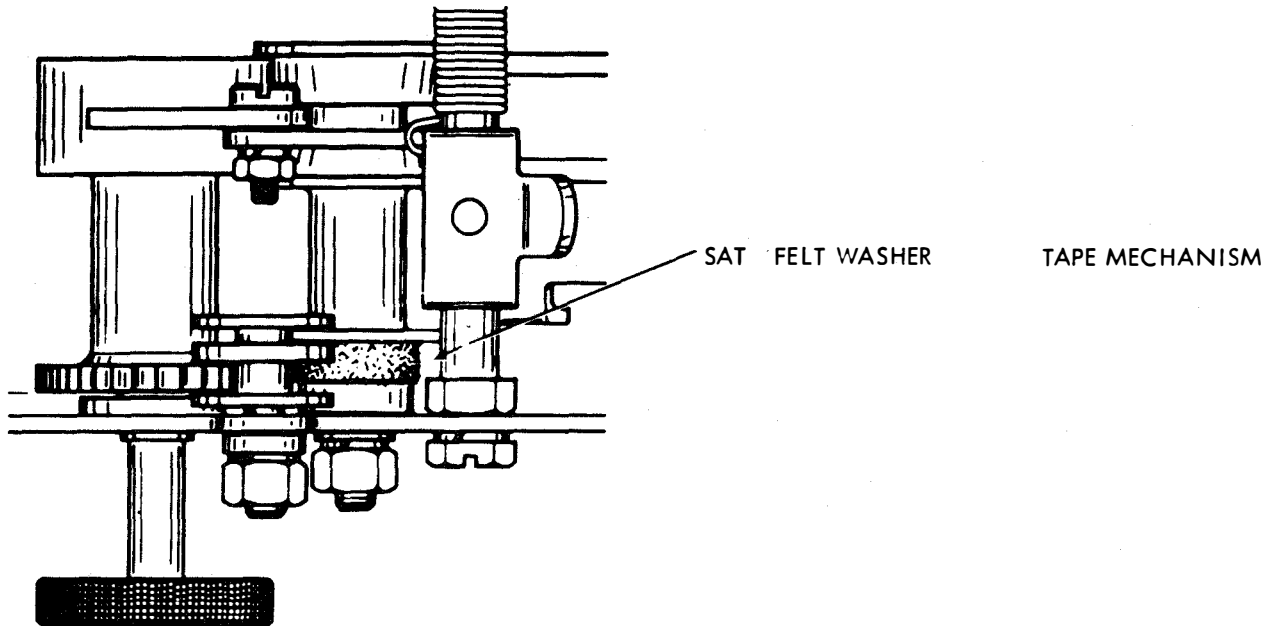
Tape Mechanism for Model 28 Tape Printer Unit
